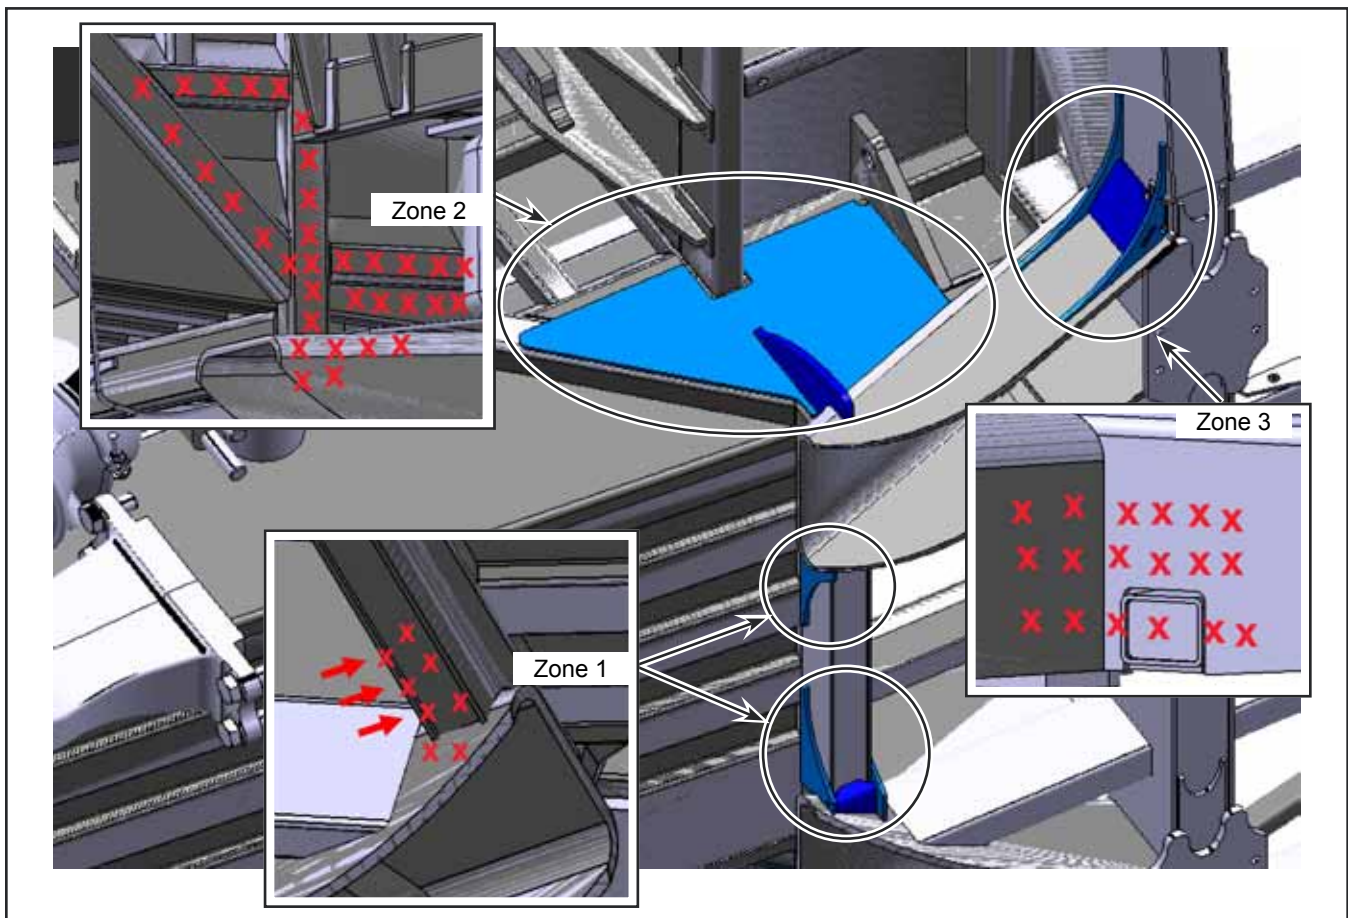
View of the Zones to Reinforce with the Plates Installed
